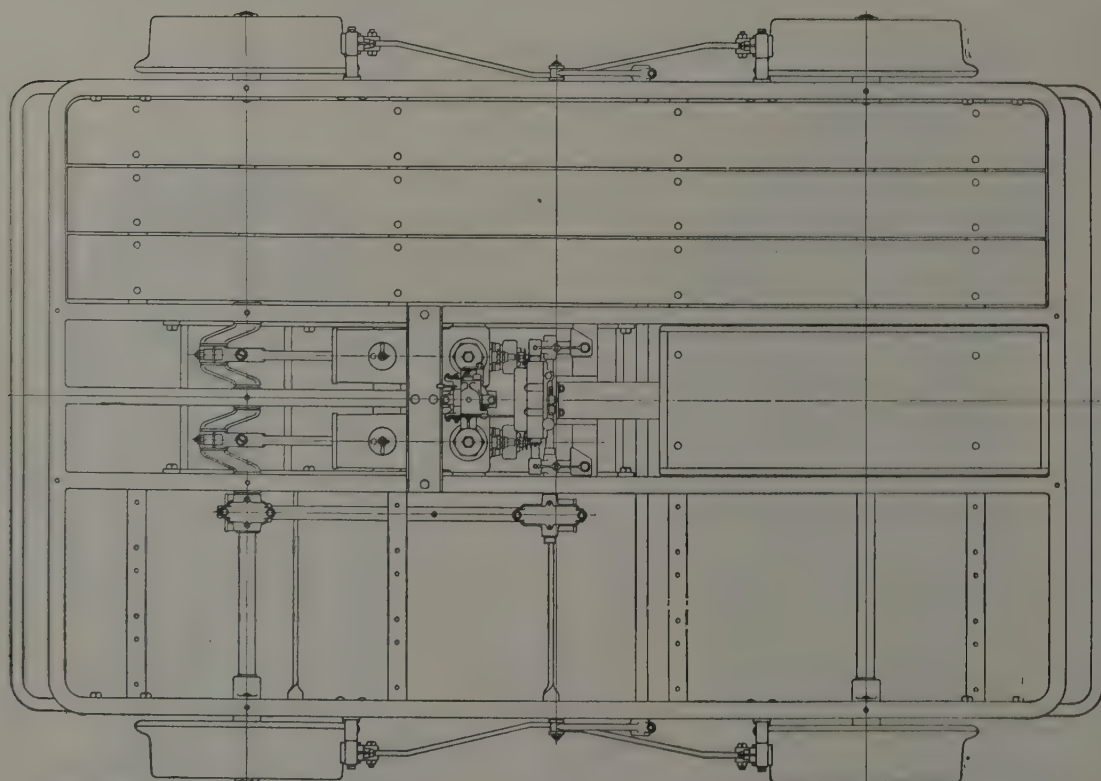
Bottom View of Rockford Motor Car, Showing Engine Arrangement. Chicago Pneumatic Tool Company.
